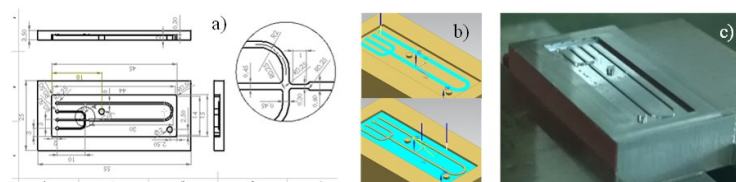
Manufacturing process chain: (a) design of mold with micro features; (b) CAM tool path generation of finishing operations; (c) Machined workpiece
